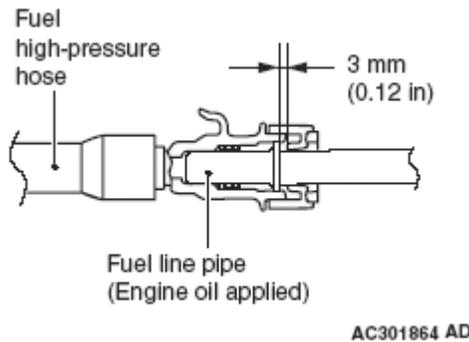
Identifying Fuel High-Pressure Hose And Fuel Line Pipe
